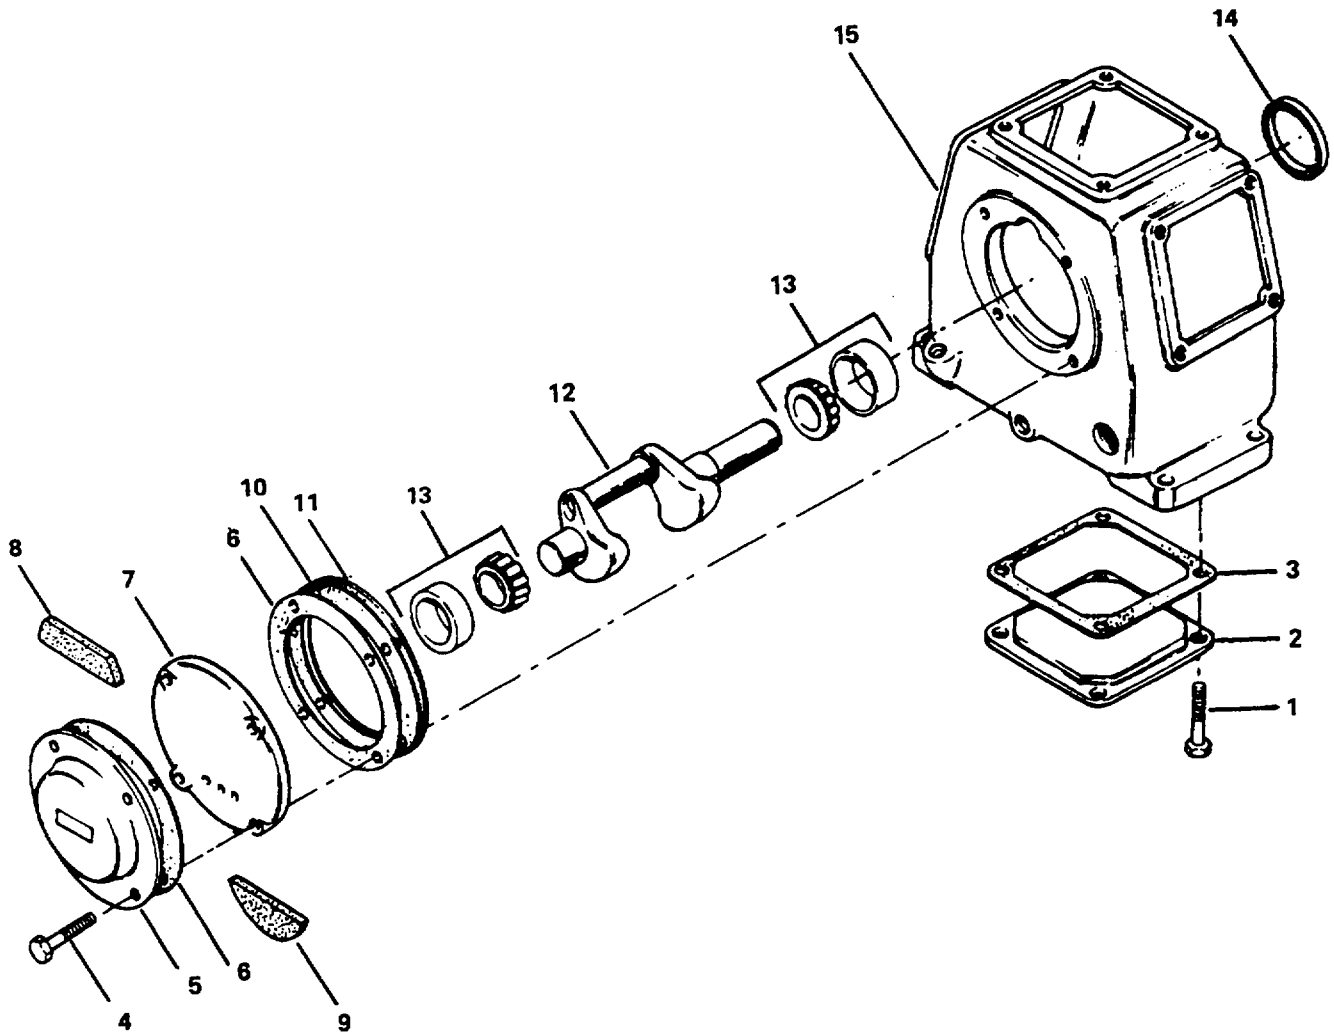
Crankshaft, Bearings and Oil Seals, Model 20-904.
